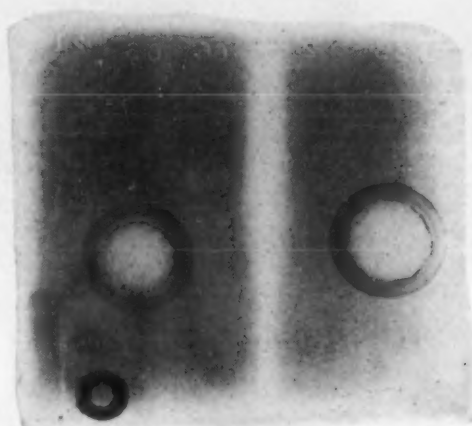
Final (circular) position of tungsten powder originally embedded to form an "X," after condenser-discharge spot welding.
